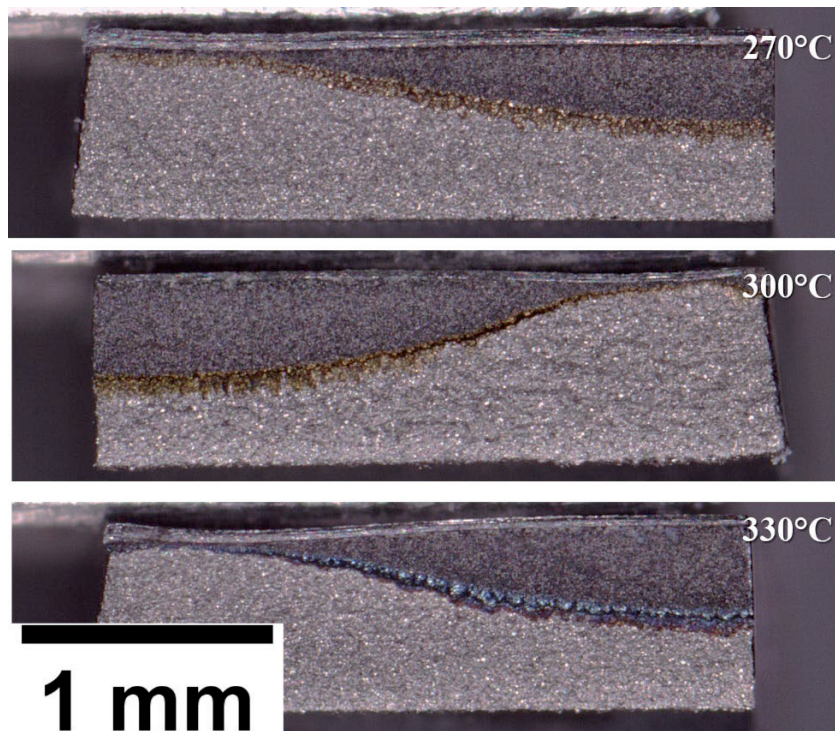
Fracture surfaces of the SINQ target rod material (401 wppm H) samples with respective test temperature.
